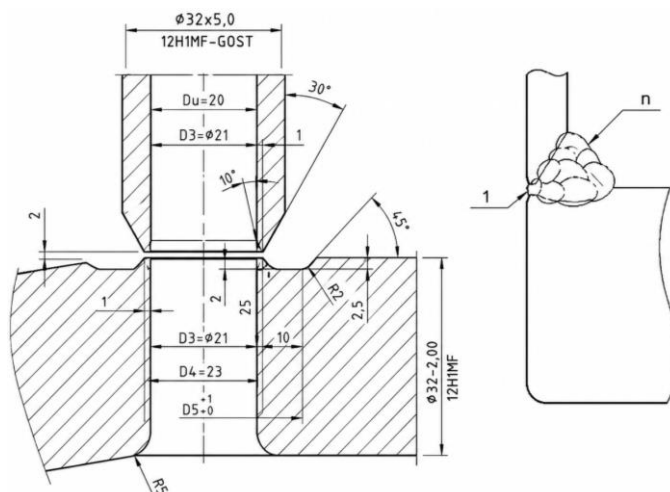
Groove layout and filling plan of stitch connections in the collector, the welded connection of pipe bends and collector pipe: material 12H1MF.
